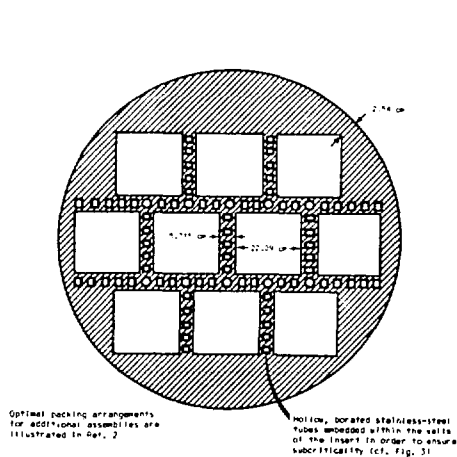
Inherently subcritical, removable aluminum insert designed to hold 10 PWR fuel assemblies.
